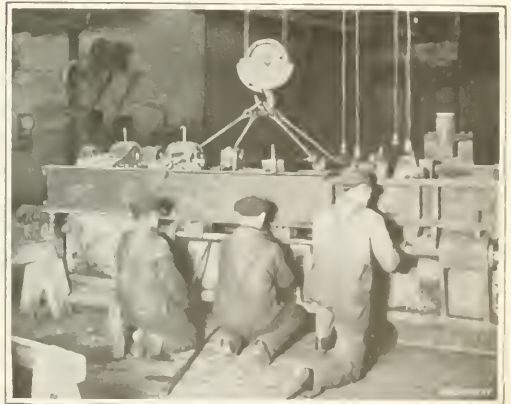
Putting One of the Hardened and Ground Steel Rods into Brackets on Casting. Notice Method of Location from Bearings on Jig
